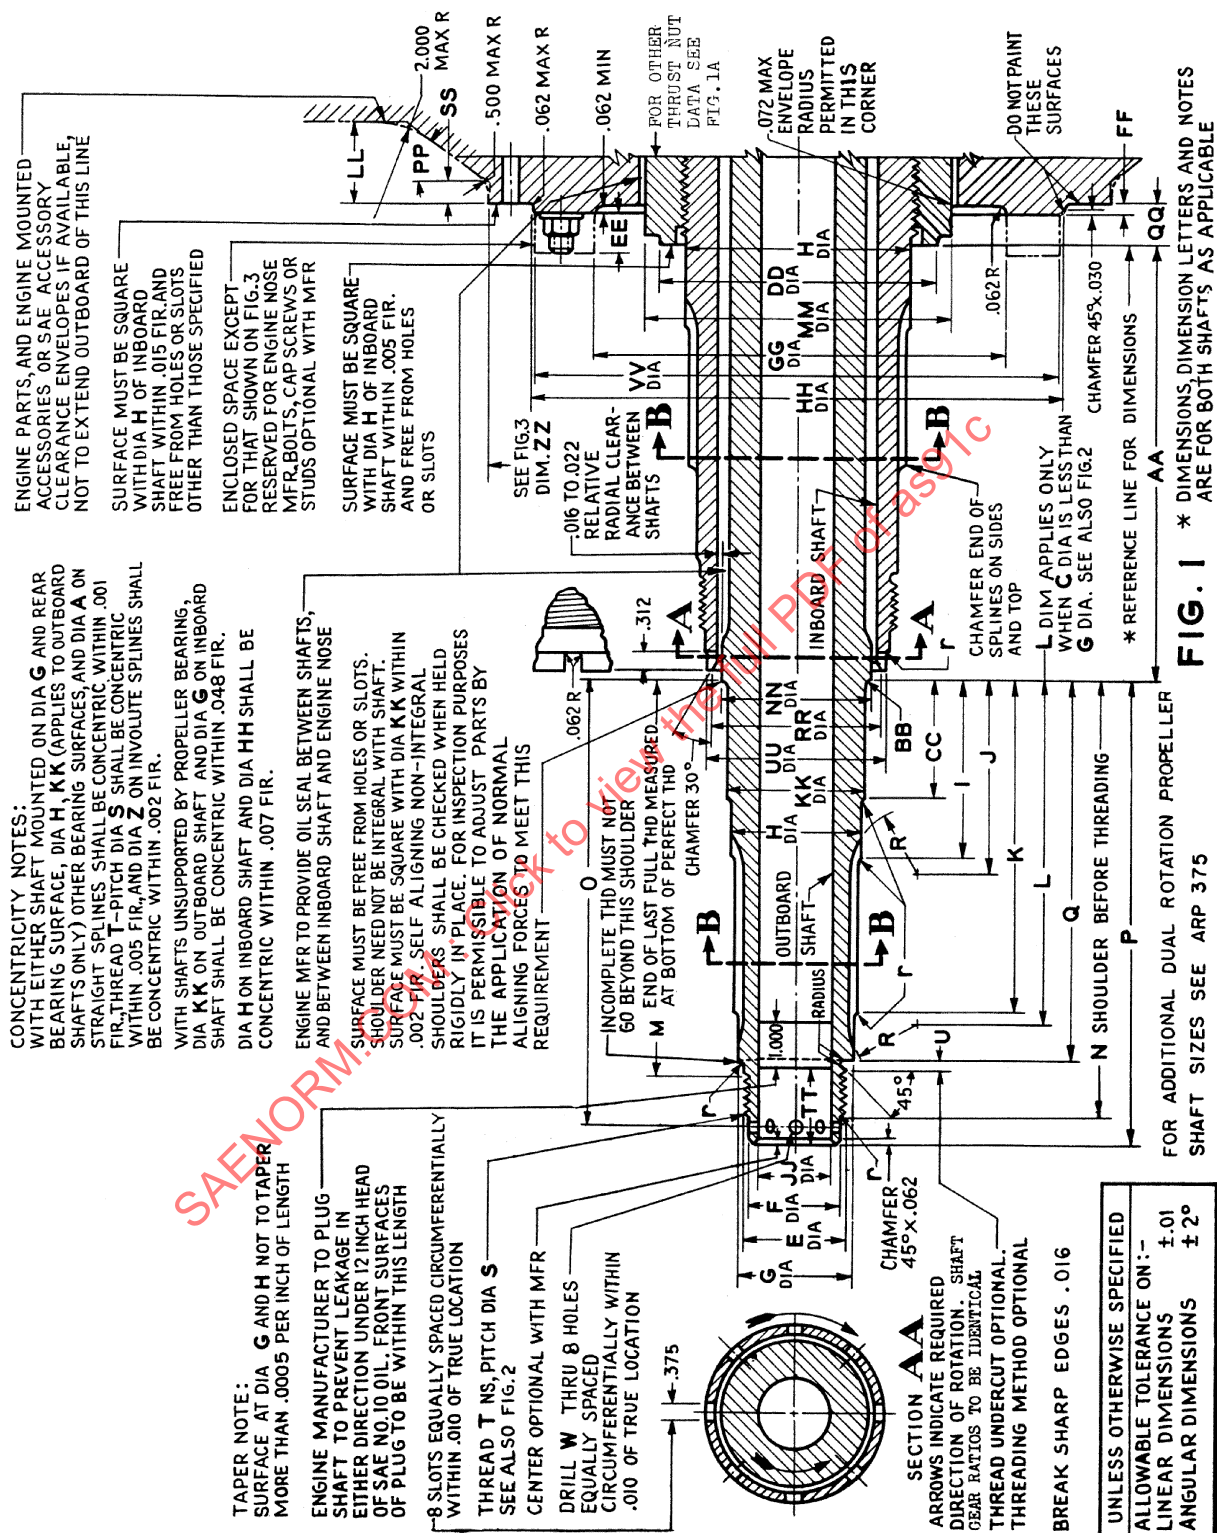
DIMENSIONS, DIMENSION LETTERS AND NOTES ARE FOR BOTH SHAFTS AS APPLICABLE
